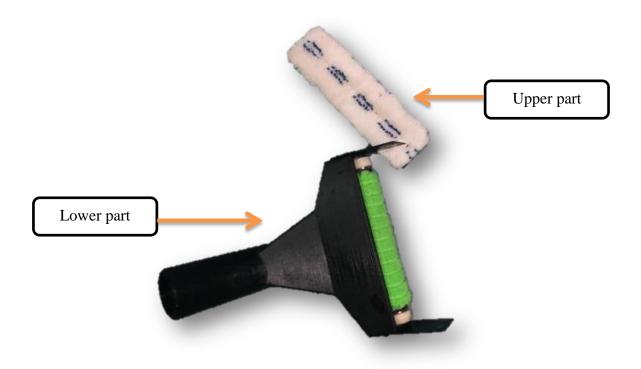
Removable parts which upper part can separate from the lower part by remove the screws
